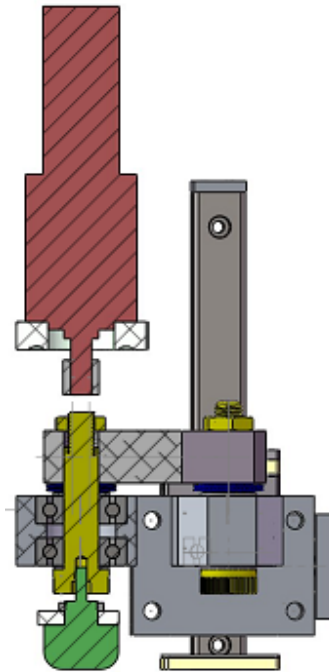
Section view of the shoulder screws used for Axis 1 and 2
